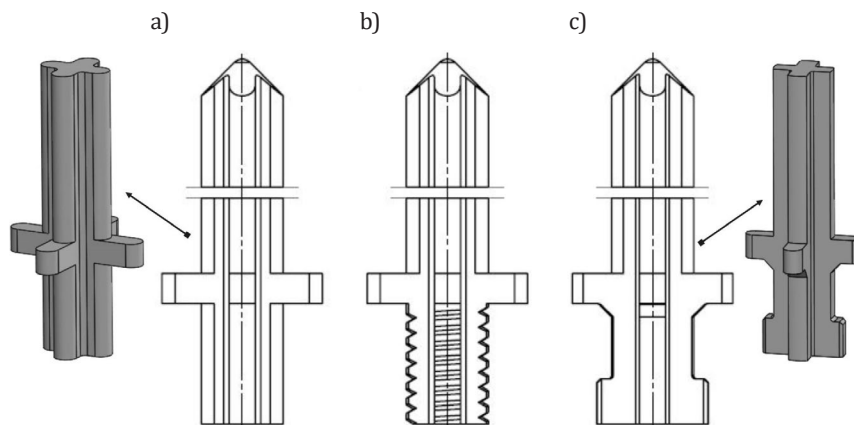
The design of the pillar with a cruciform cross-section base. Base: a) standard; b) with extra threads; c) bayonet-like shaped
